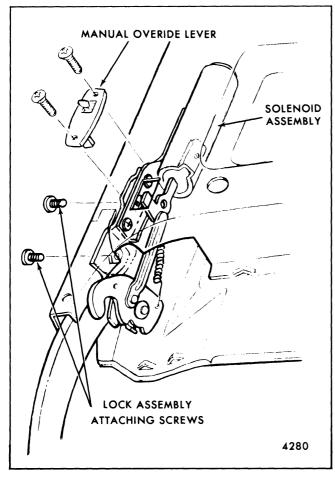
Front Seat Back Electrically Operated Lock - "A, B and C" Two-Door Styles, Standard Full Width Seat
